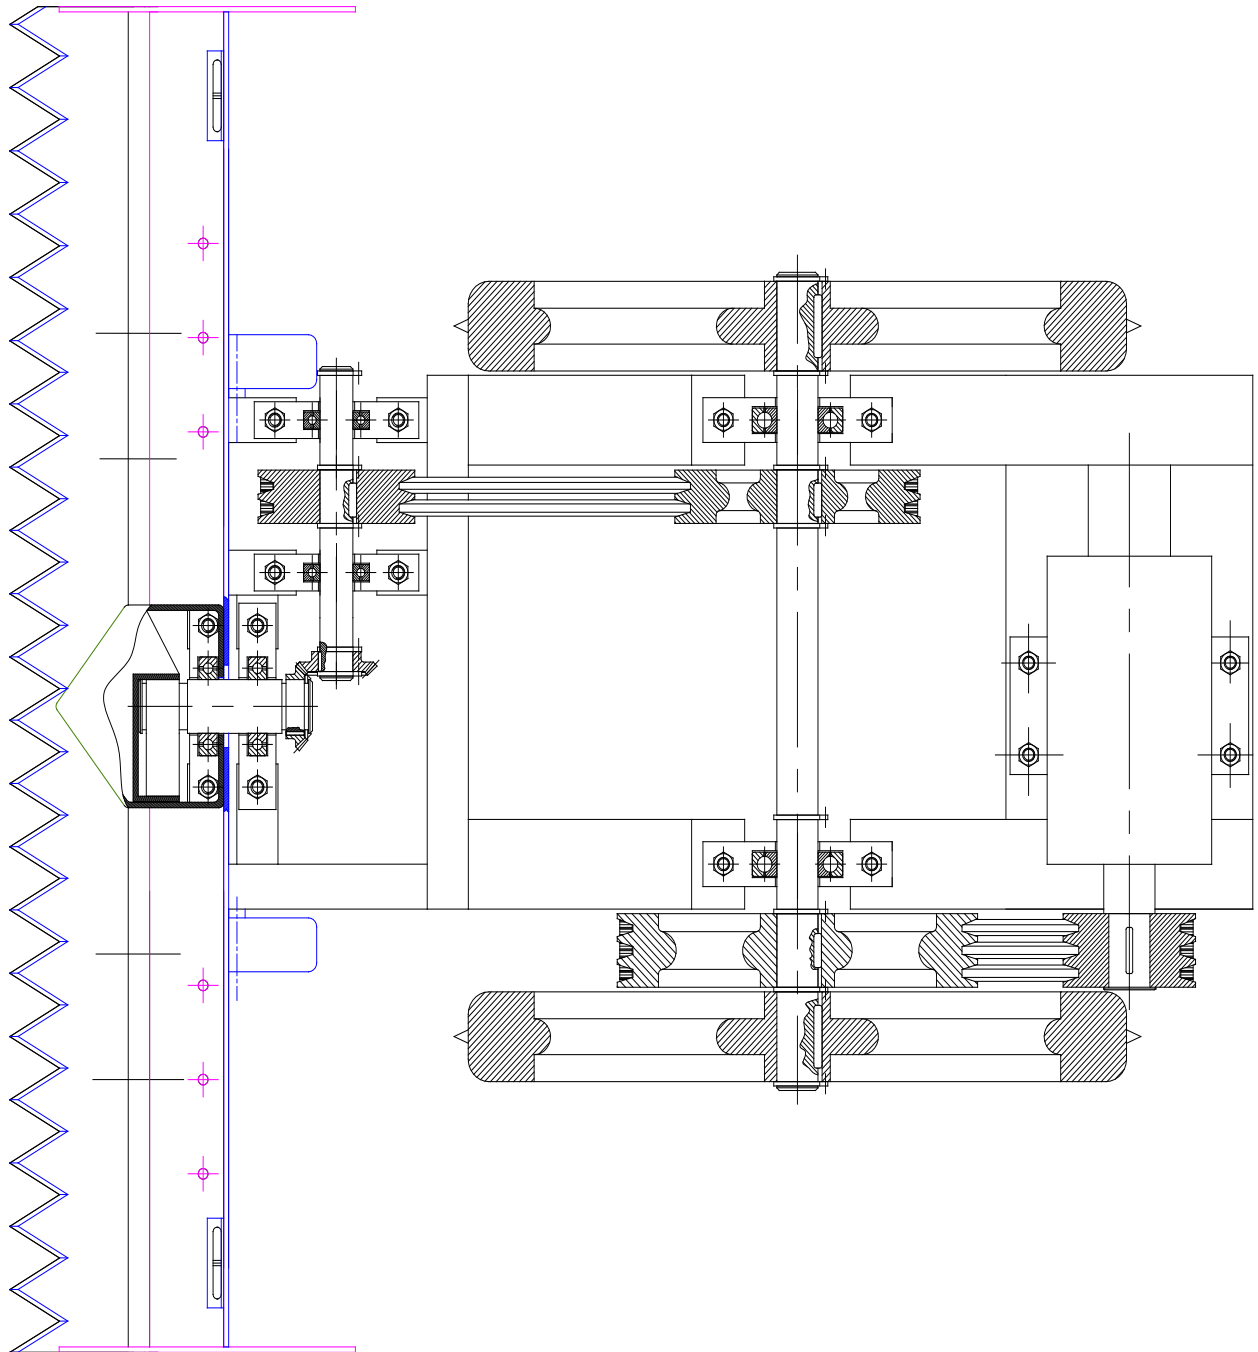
Alternative B- Reciprocating Cutter Mower (sickle bar mower) as viewed from top
